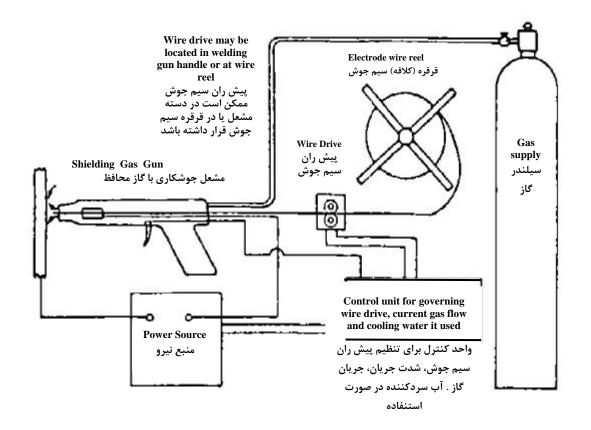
DIAGRAM OF GAS METAL ARC WELDING EQUIPMENT شکل ۹- نمودار تجهیزات جوشکاری قوسی با میل جوش فلزی تحت گاز محافظ
